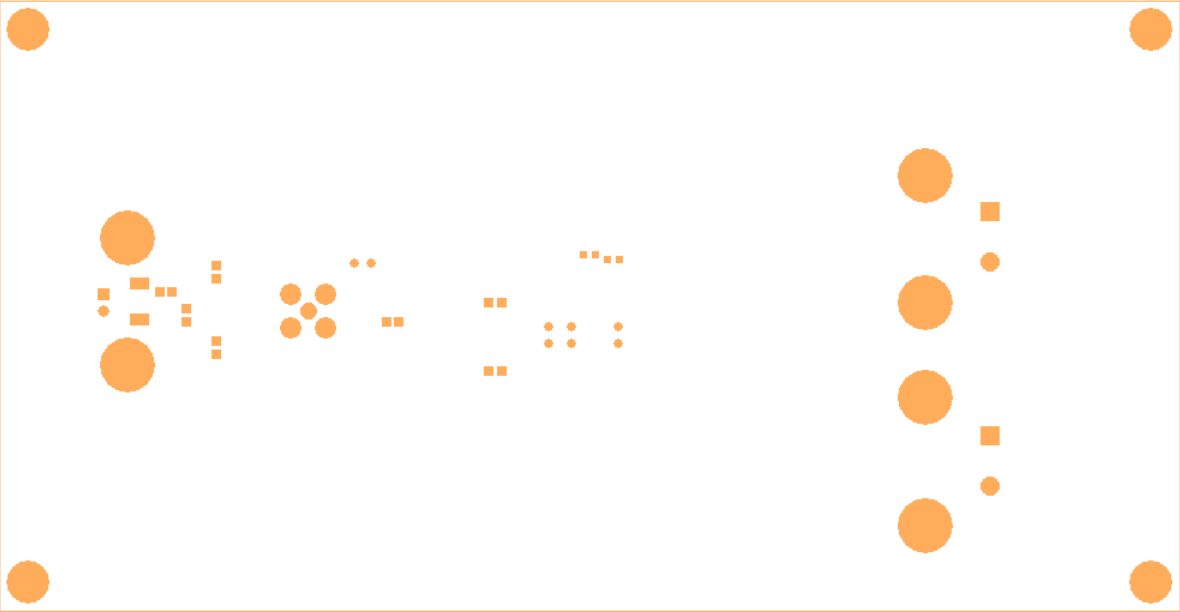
EPC7C020/EPC7011L7 Boost Evaluation Board Bottom Solder Mask.
